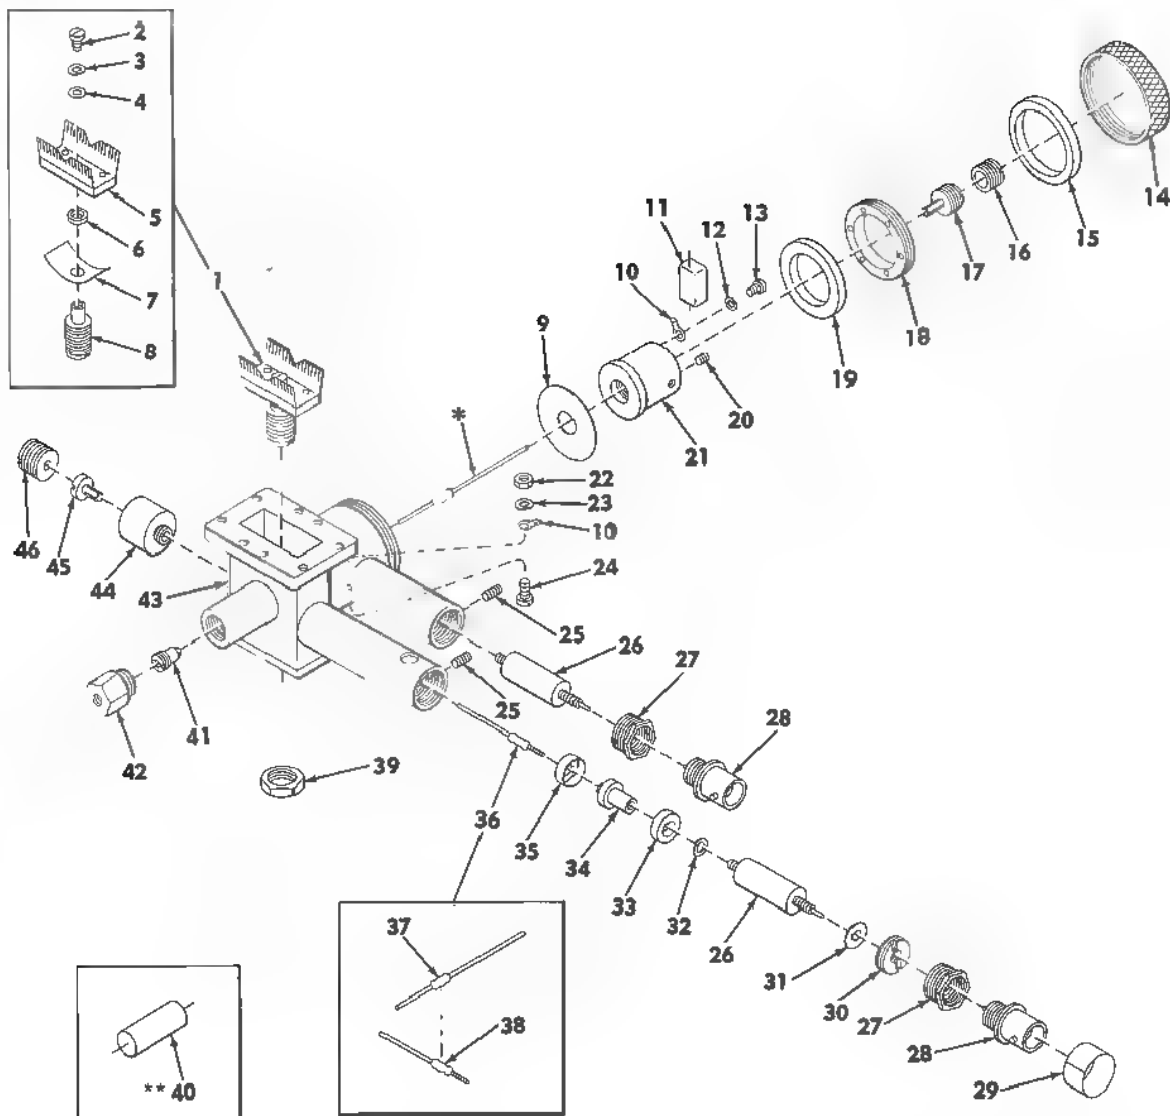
COVER, PLATE ACCESS SUBASSEMBLY /9006419/-EXPLODED VIEW
